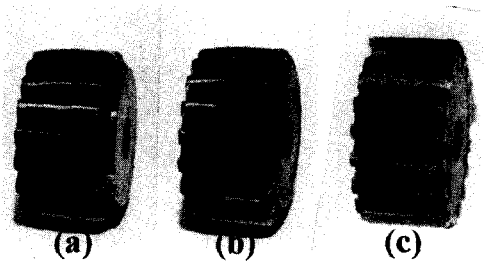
Cold forged spur gear (clamping type, h=15mm)
